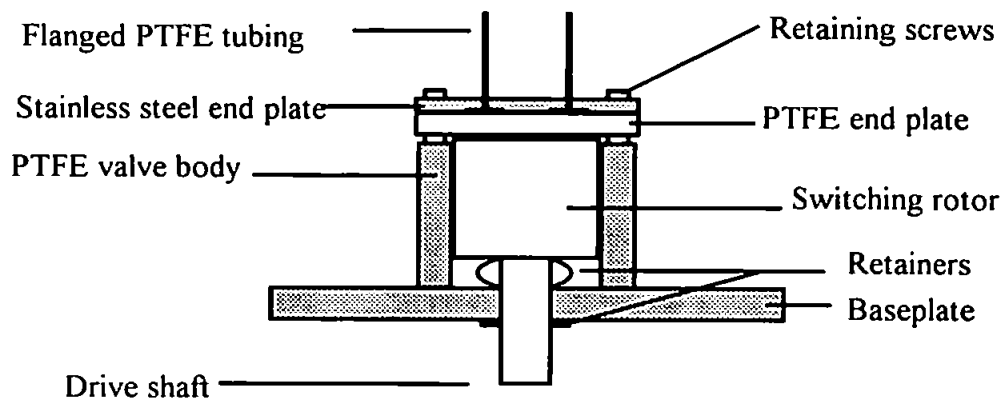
Diagram of valve head showing gap between PTFE end plate and body
